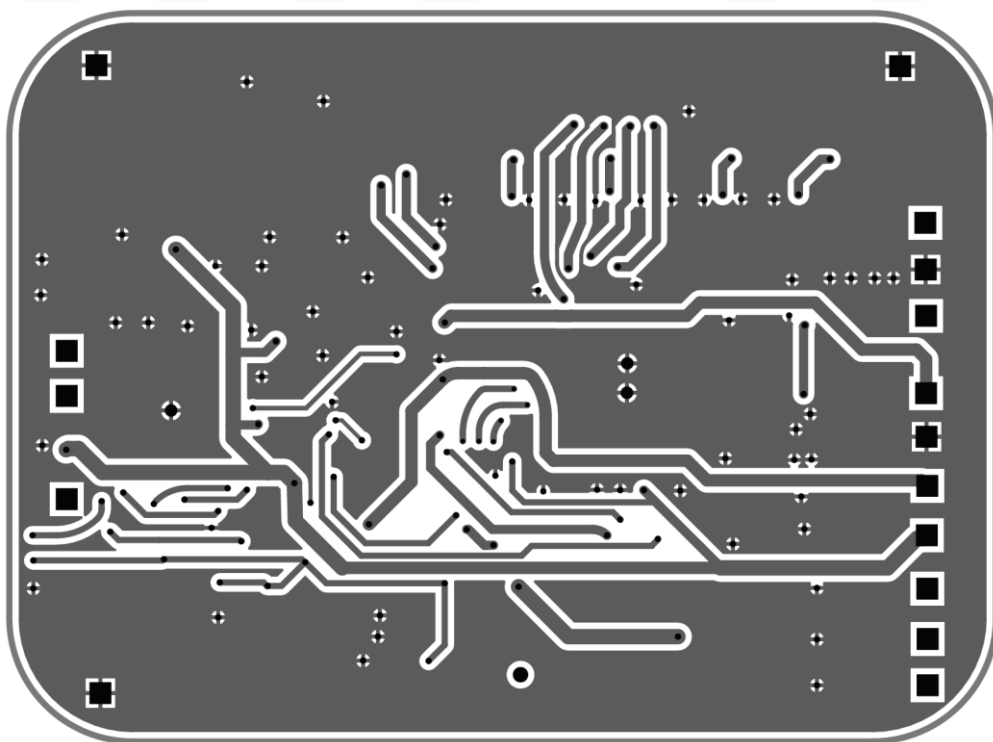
2: Bottom layer layout of the miniaturized PCB (2d)
